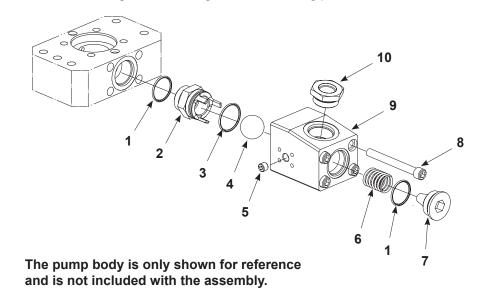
Hydraulic Section Pump Outlet Manifold Module
